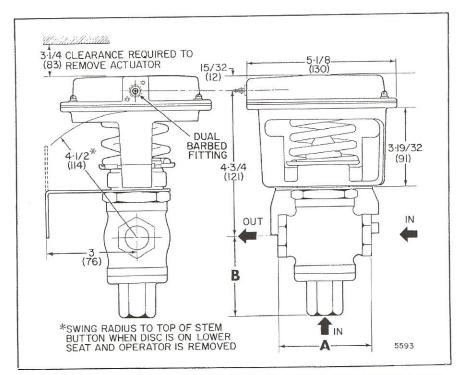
VP519C APPROXIMATE DIMENSIONS IN INCHES (MILLIMETERS) SEE TABLE 1 FOR A AND B DIMENSIONS
